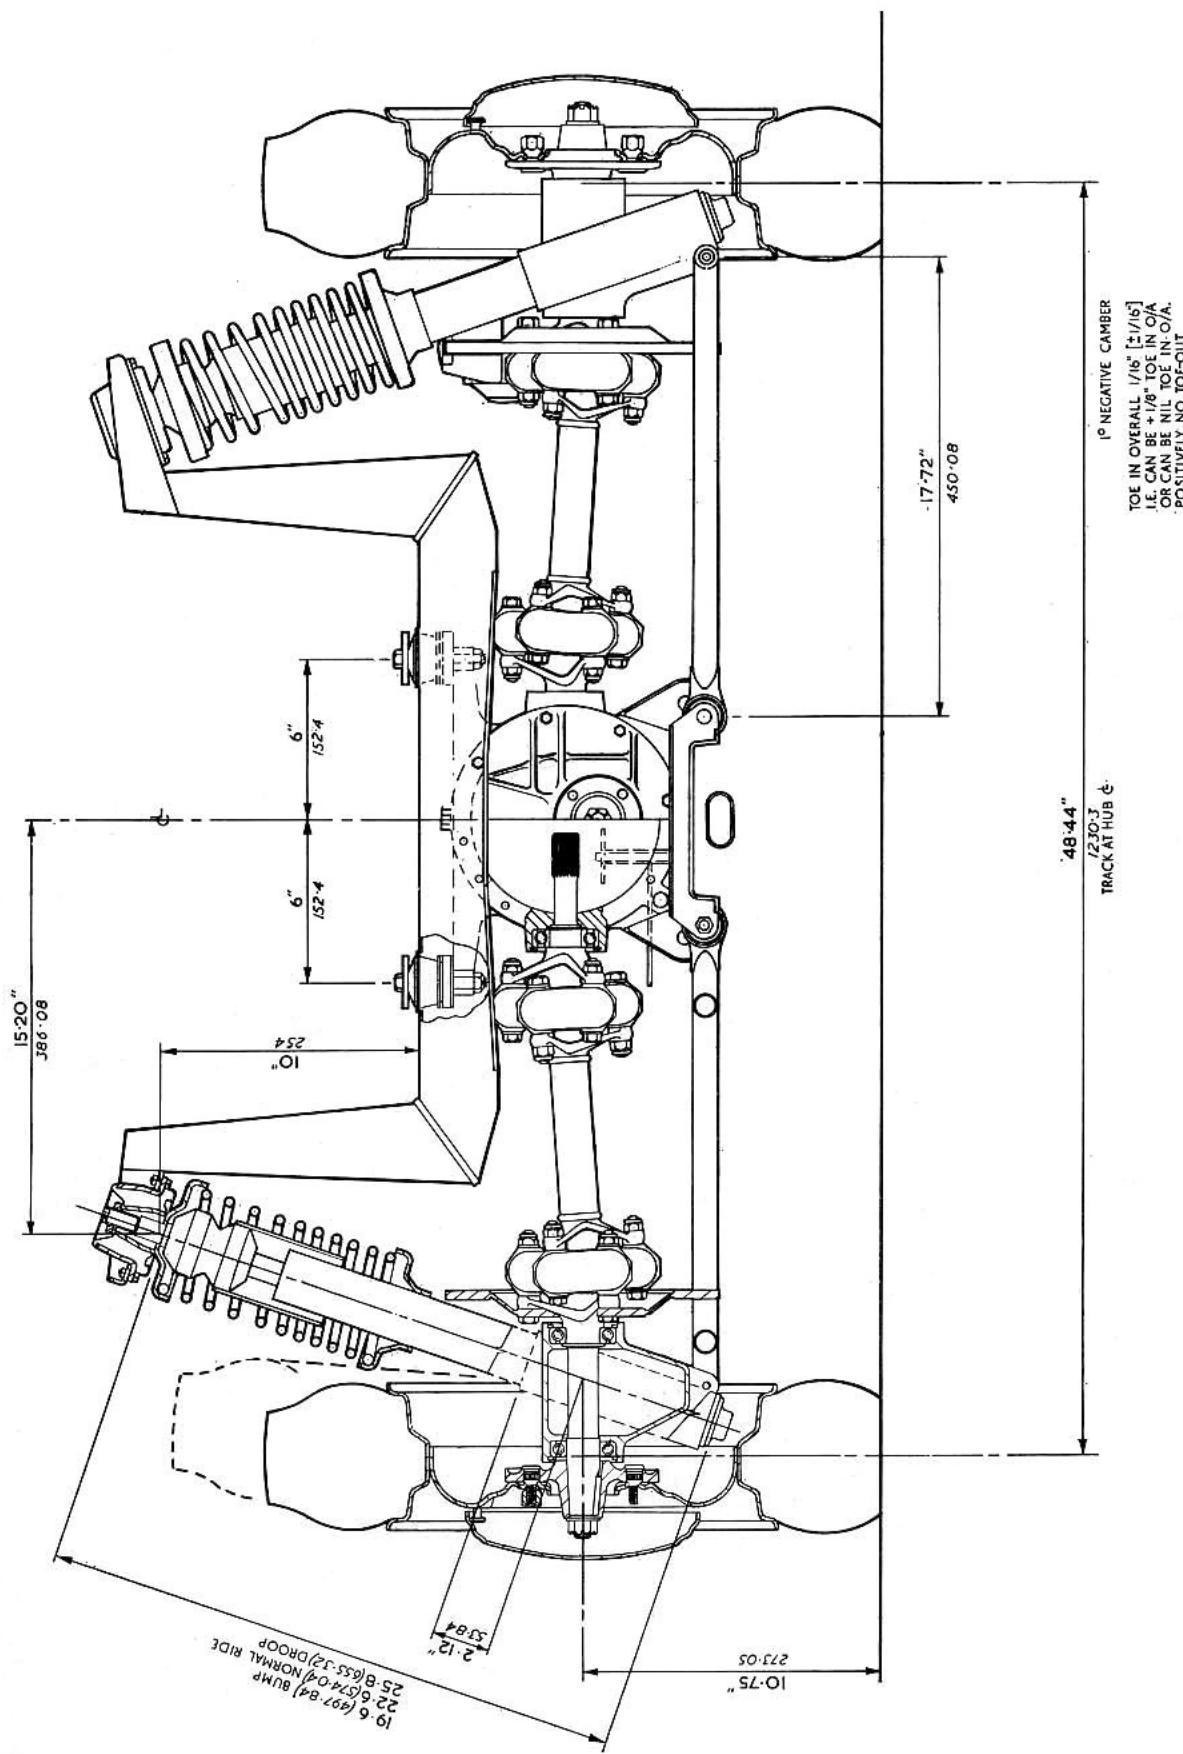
GENERAL ARRANGEMENT—REAR SUSPENSION
